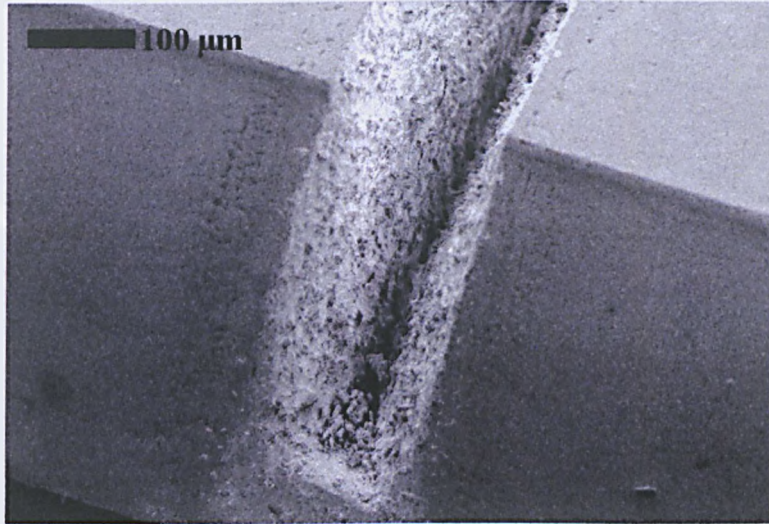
V-groove machined in x-cut LiNbO_3 with a ArF excimer laser.
